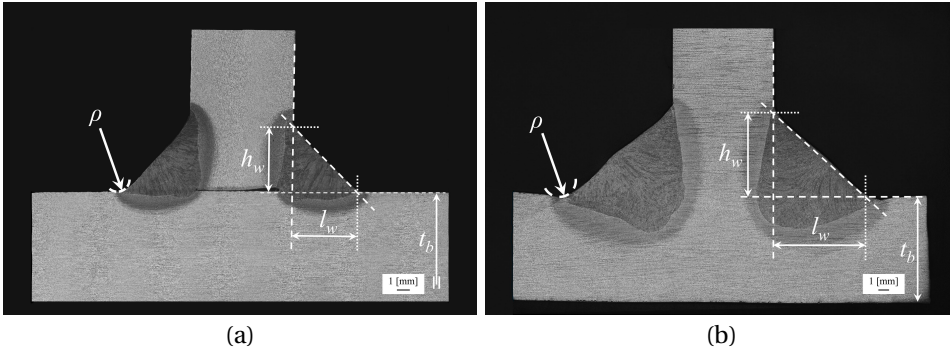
Macro images for the reference (a) and hexapod (b) welds.
